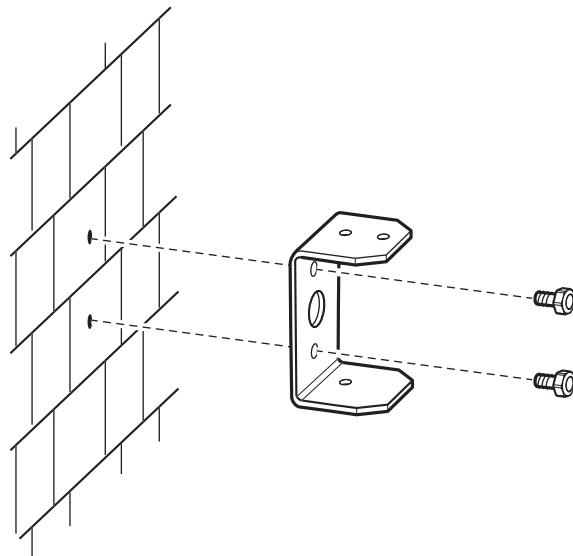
Attaching the mounting plate to the Nokia FastMile 4G Receiver
